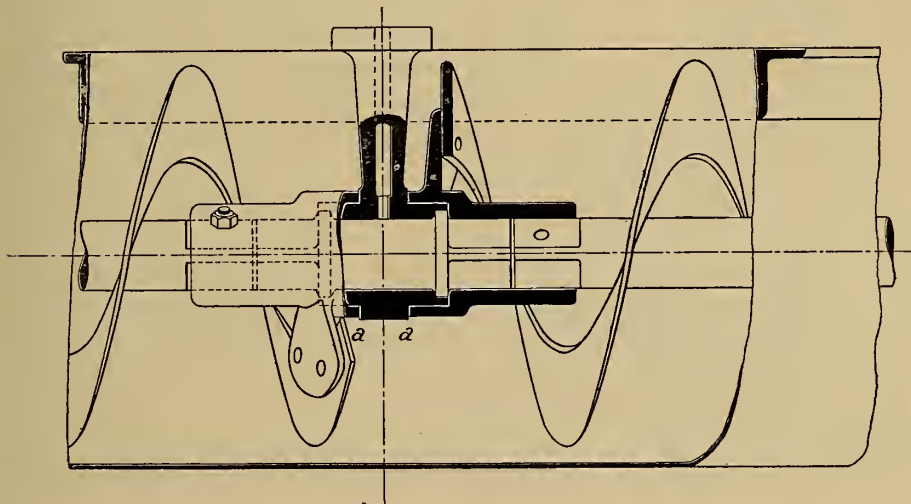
DUSTPROOF CONVEYOR BEARING MADE BY THE CONVEYOR &amp; ELEVATOR CO., ACCRINGTON, ENGLAND
